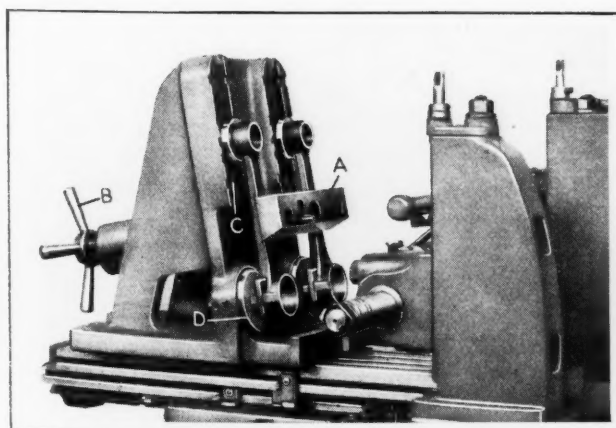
Fixture Used in Milling Locating Pads on Connecting-rods B, Fig. 2
